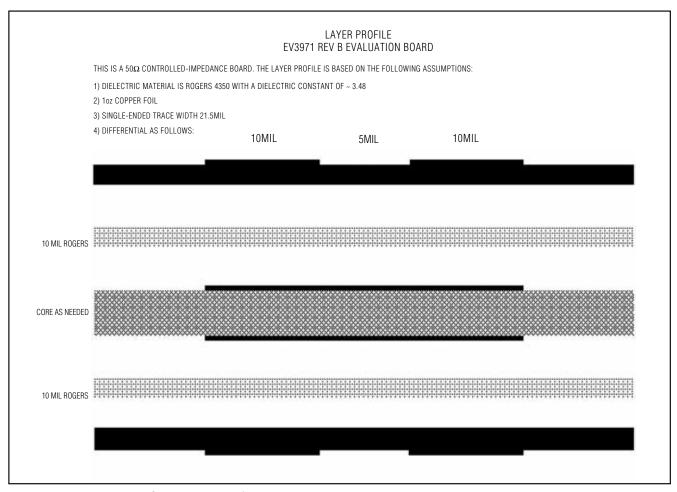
MAX3971 EV Kit PC Board Layer Profile
